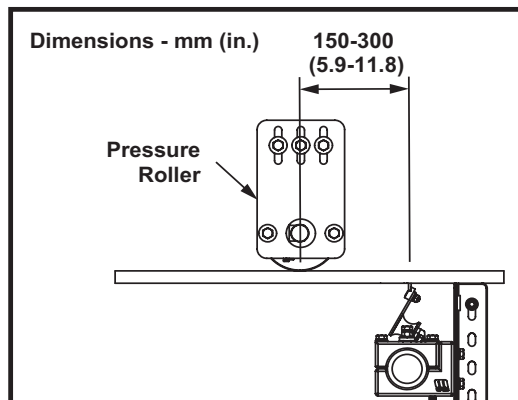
Martin® P2 Secondary Belt Cleaner HD Bolt Tensioner Pressure Roller Belt Flattening
